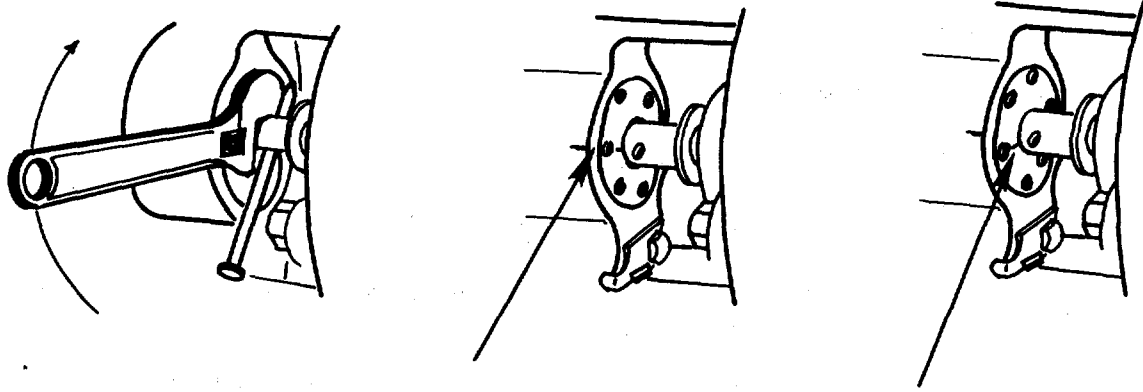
Impeller Running Clearance Adjustment.
